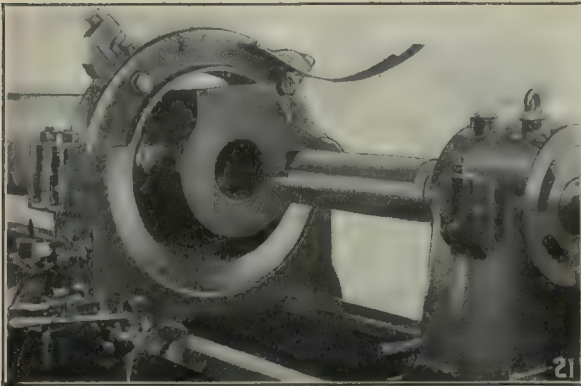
FINISH-BORE REAMER ABOUT TO ENTER GUN
